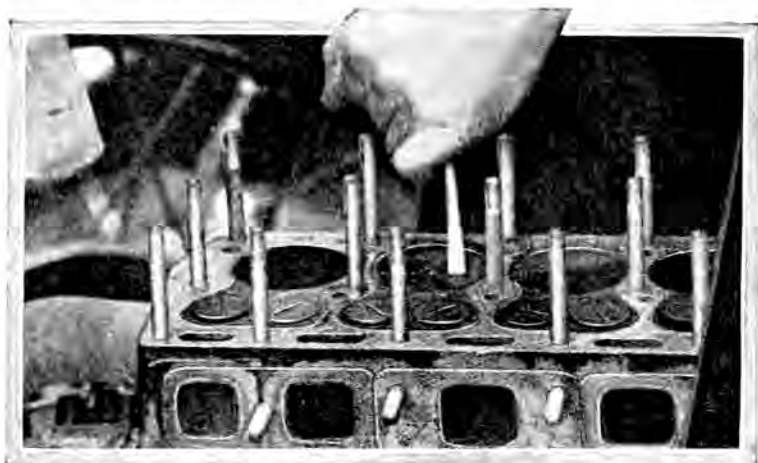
REMOVING CARBON FROM PISTON CROWNS
